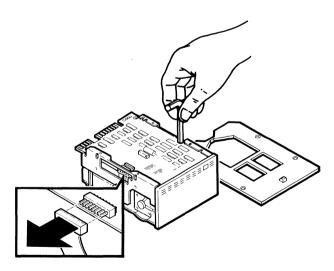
RD51 Disk Drive Allen Screws and Connector P5 Removal
